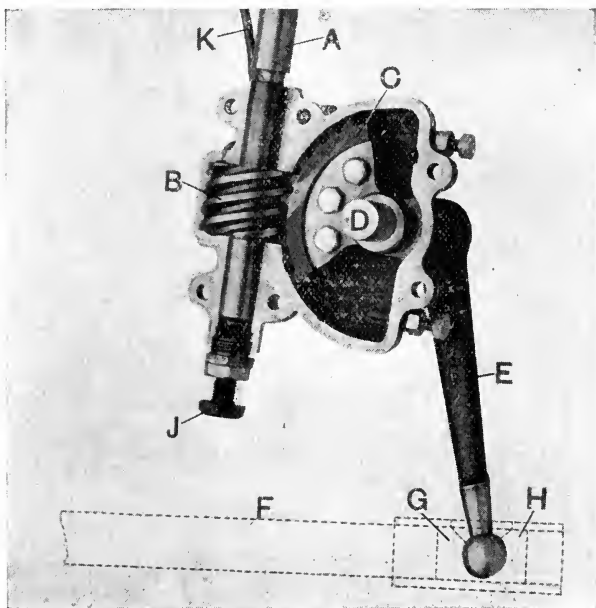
STEERING CONNECTIONS—WORM AND SECTOR.
